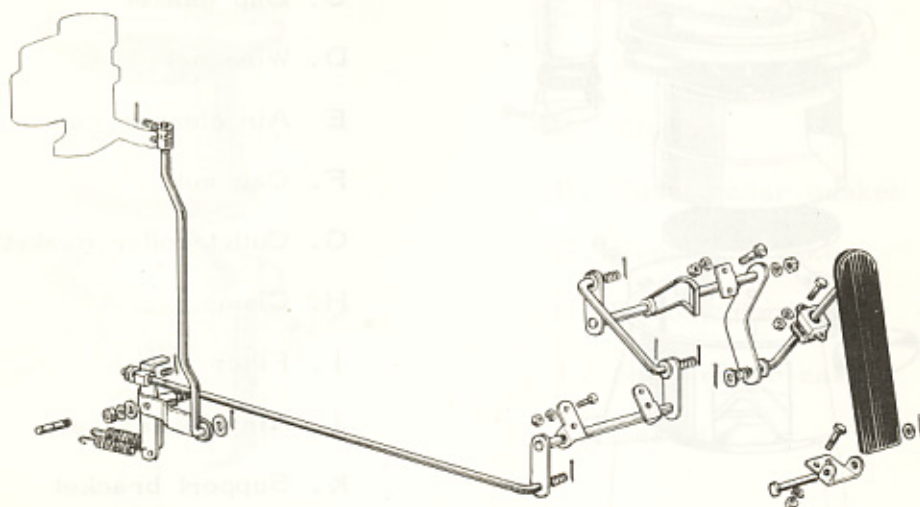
Accelerator Linkage (FJ RHD vehicles)
